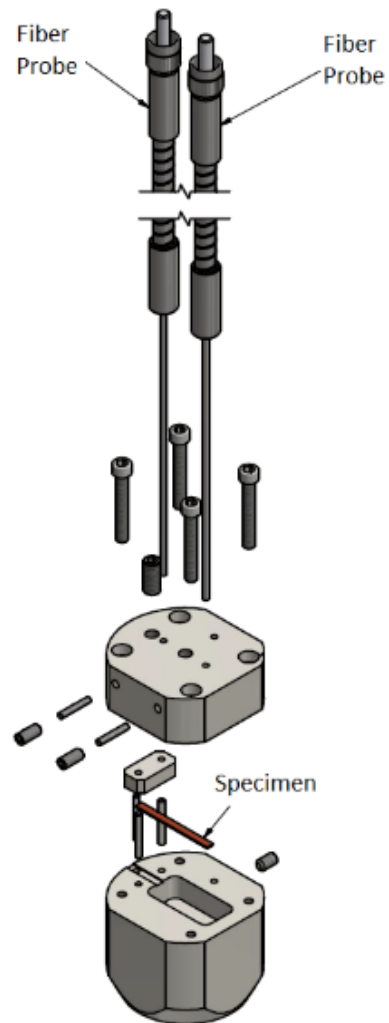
Exploded view of the RUSL design from Woolstenhulme et al. [158]. Only one copper specimen is tested in this original experiment with the two fiberoptic cables.
